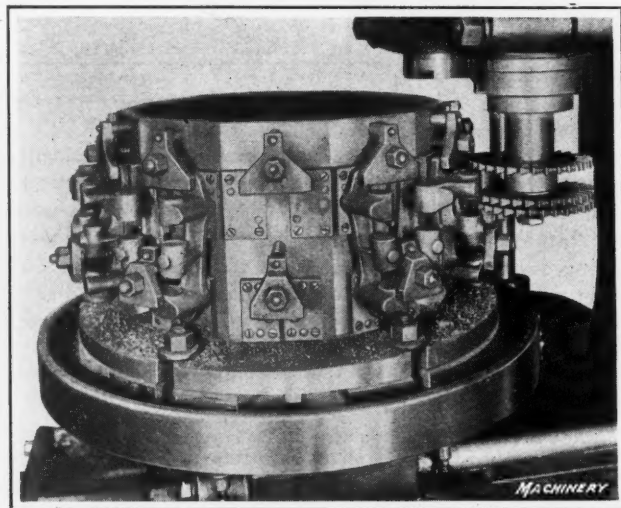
Machining Angular Bracket Faces on Newton Continuous Rotary Miller
